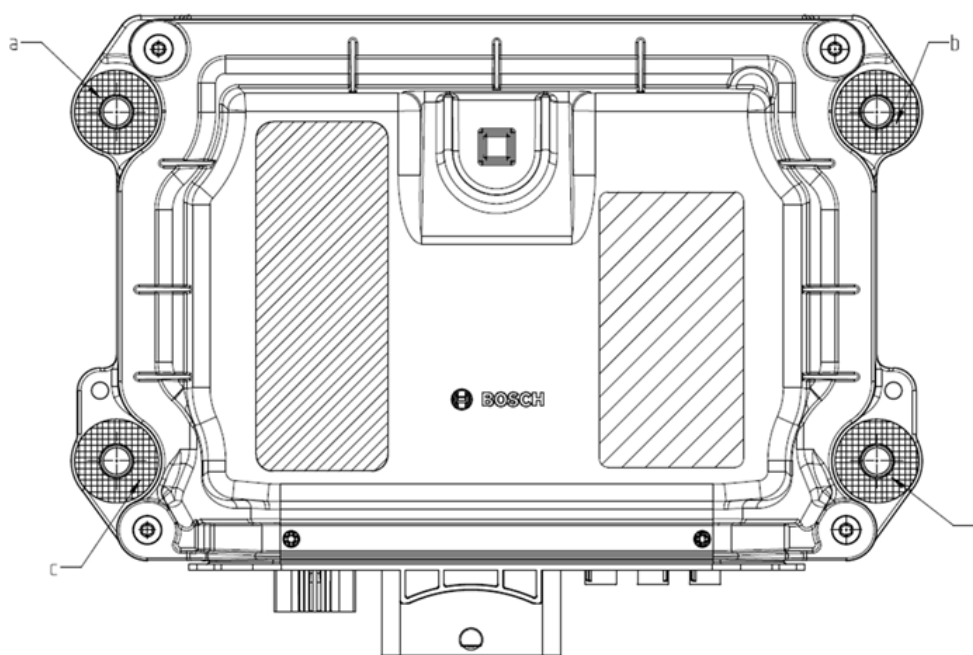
Top side view of the CCU*Figure 7 Mounting screw positions
